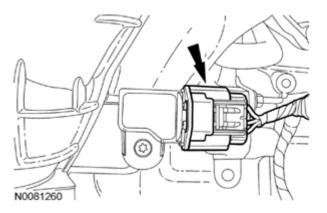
Locating Manifold Absolute Pressure Sensor Electrical Connector Courtesy of FORD MOTOR CO.
